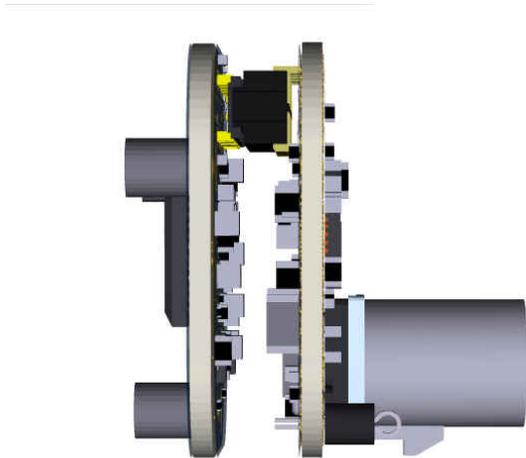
3-D PCB Assembled Boards (Side View)
